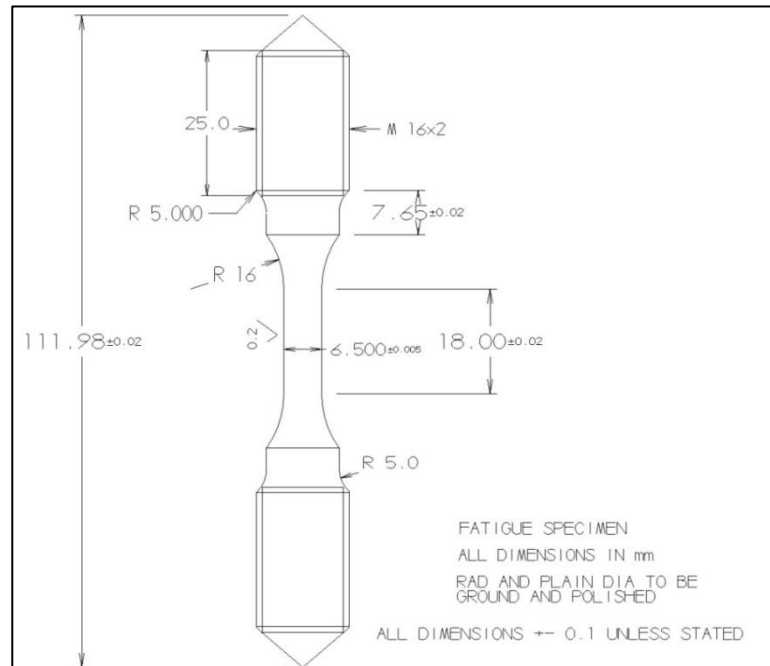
DB P92 uniaxial fatigue specimen dimensions.
